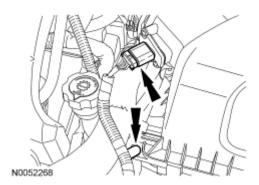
Locating Brake Booster Vacuum Hose Courtesy of FORD MOTOR CO.
